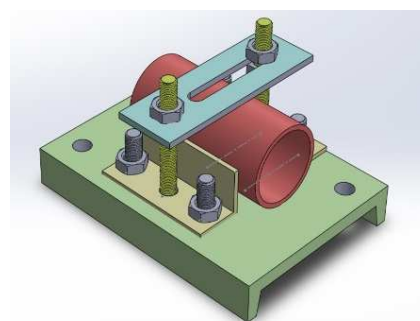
Clamping device for external diameter pipe between Ø 15 mm and Ø 30 mm.
